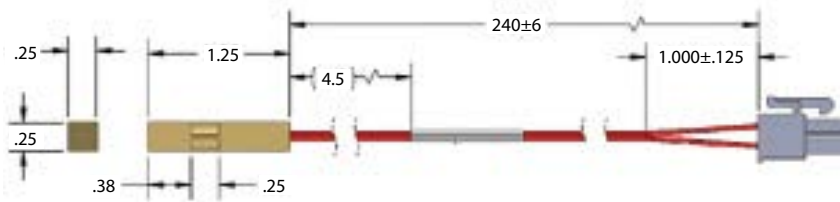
SENSOR IN MACHINED BRASS HOUSING
